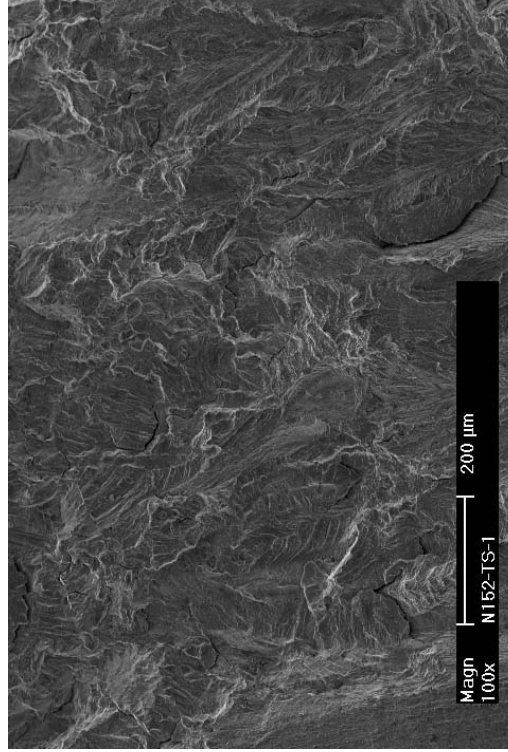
Specimen N152-TS-1, region A of fracture surface IG-1. Crack advance is from bottom to top.
